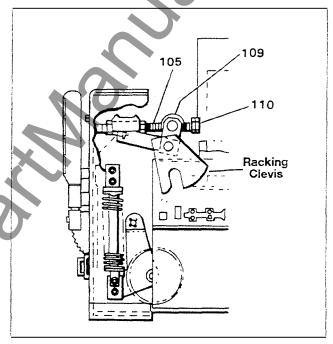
Detail of Typical Racking Mechanism and Drawout Interlock
